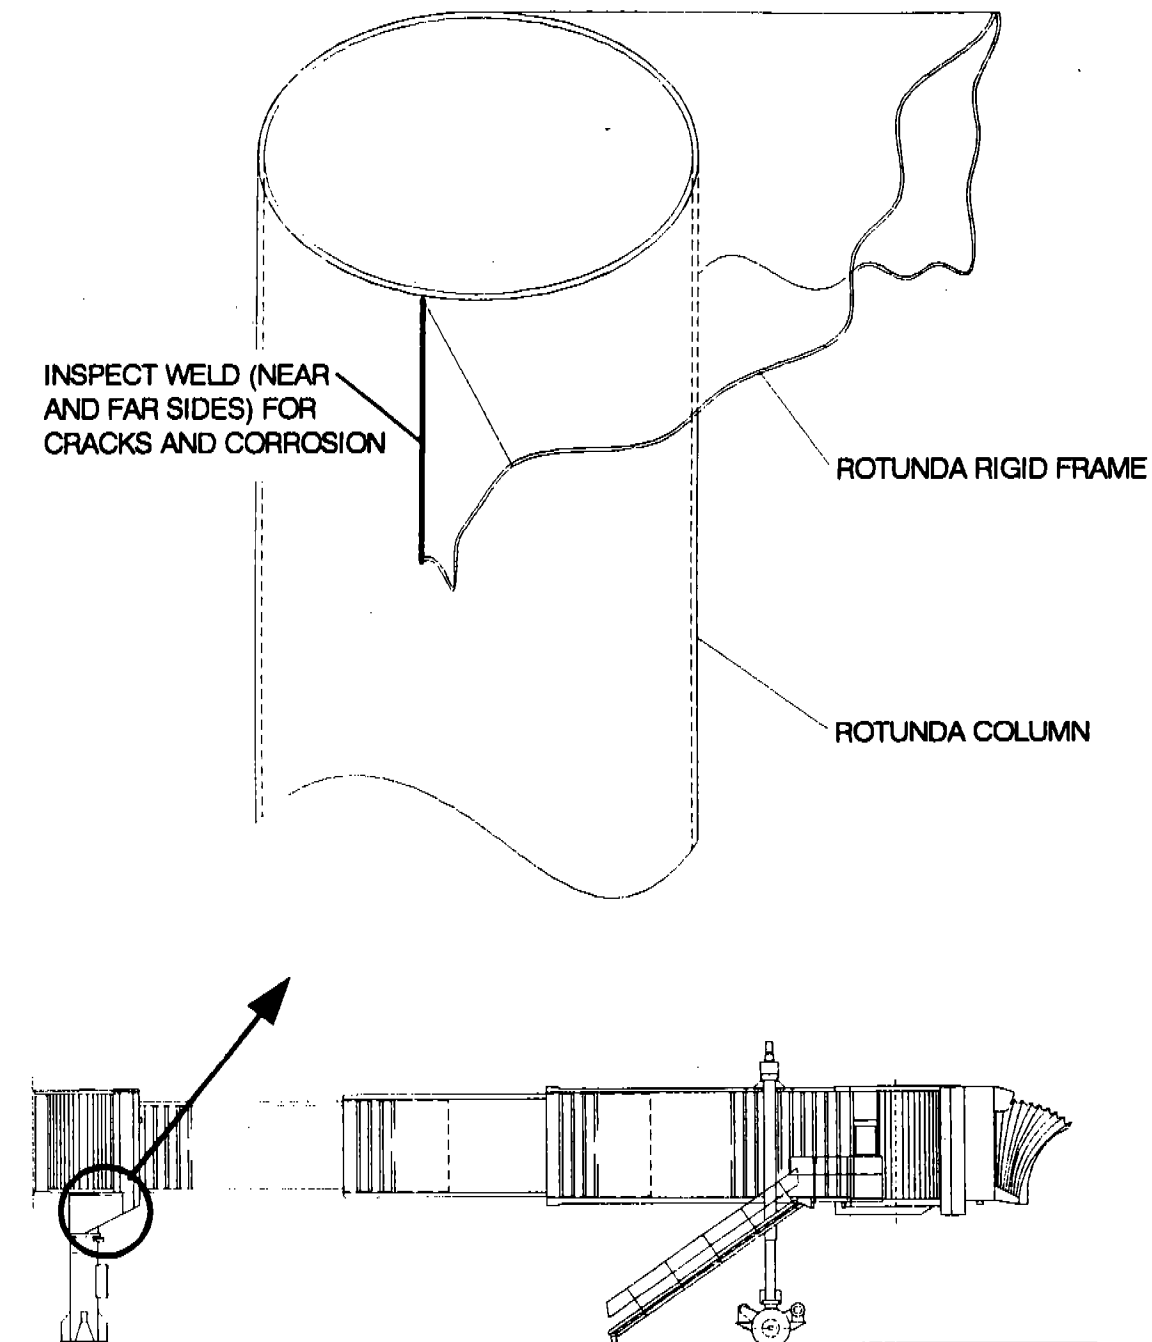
Rotunda Rigid Frame Weld Inspection
